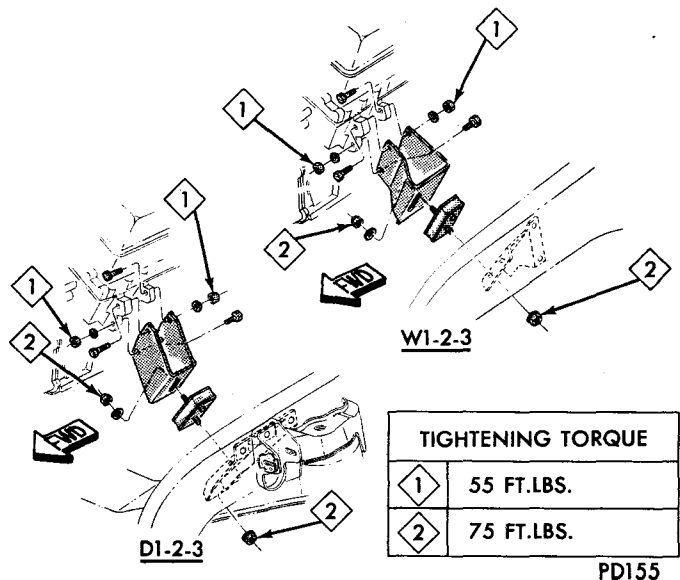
Engine Mounts—Front—440 Cubic Inch Engine Models D100-200-300 and W100-200-300
